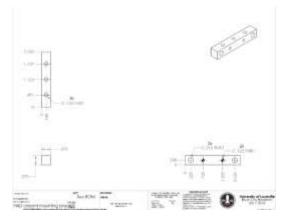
FWD and AFT end crescent mounting plate as built drawing.
